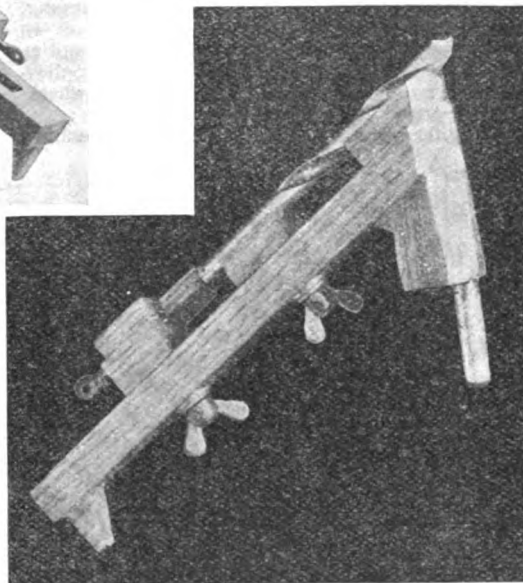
THE TWIST-DRILL GRINDING ATTACHMENT.
